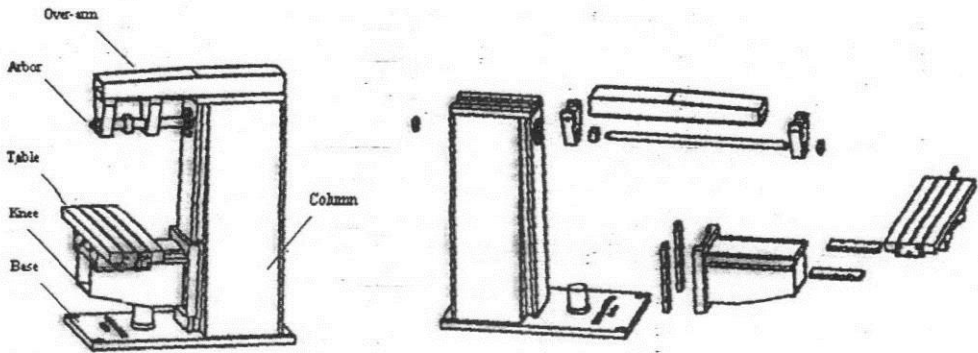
Three-dimensional drawing of the RP model of the milling machine.
